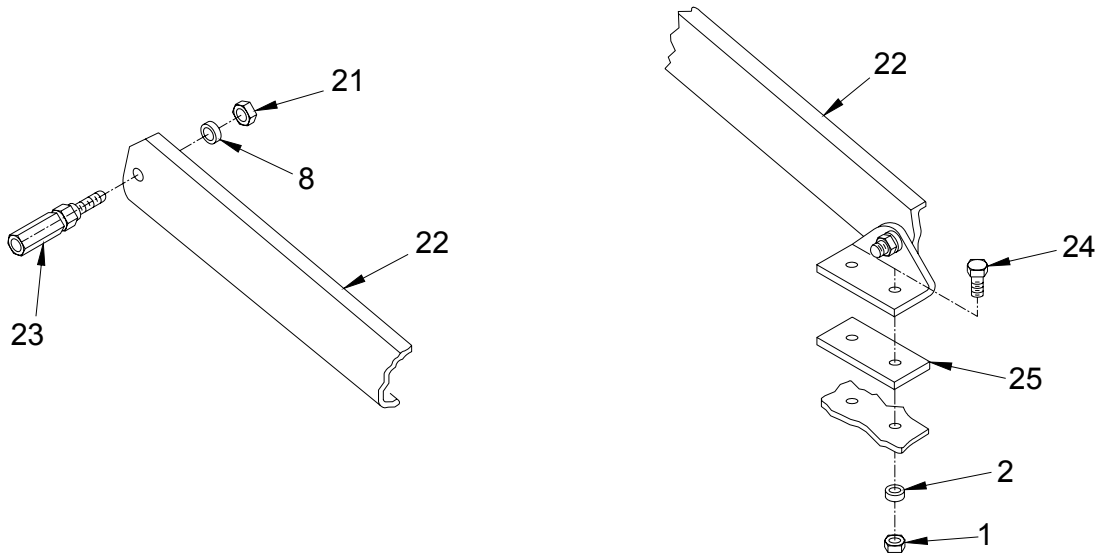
FRAME AND HOUSING ASSEMBLY/MAIN ACCESS COVER
